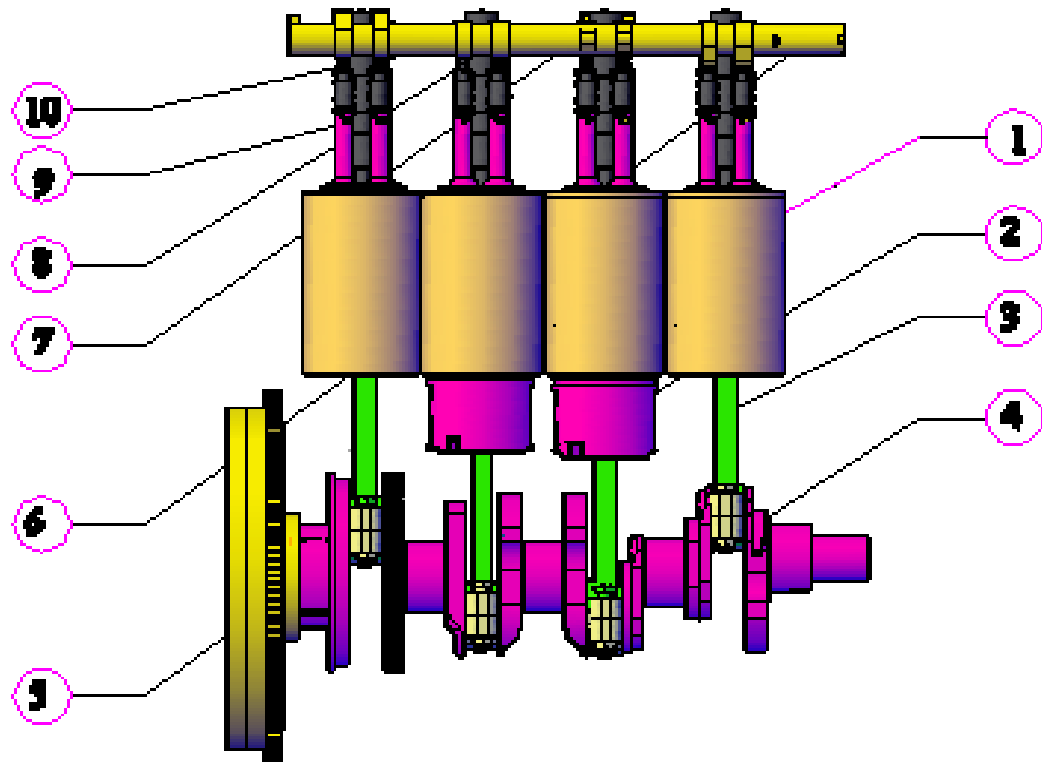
5 Three Dimensional Sketch of the Crank and Valve Gear Mechanism: (1) Cylinder Liners, (2) Pistons, (3) Connecting rod, (4) Crankshaft, (5) Flywheel, (6) Camshafts, (7) Cams, (8) Rocker Arms, (9) Valves, (10) Valve Springs
